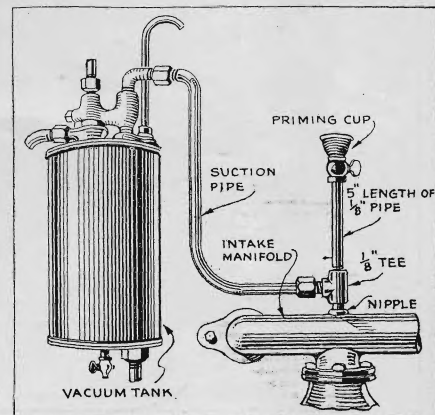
This simple primer, which attaches to vacuum line, is easy to install in most cars.
